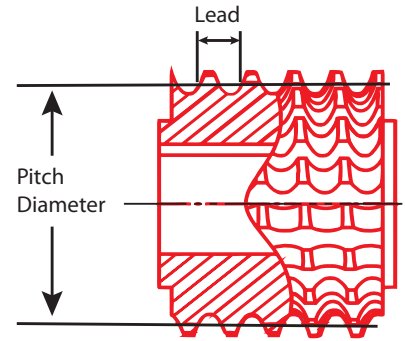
The hob is basically a worm with gashes cut across it to produce the cutting edges.
